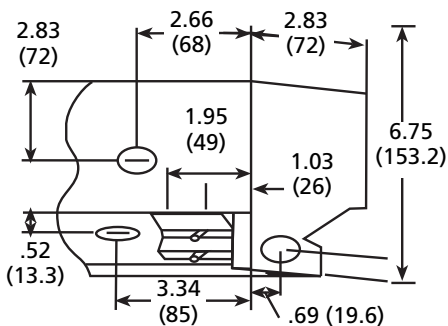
Wiring Compartment Dimensions – in. (mm)
